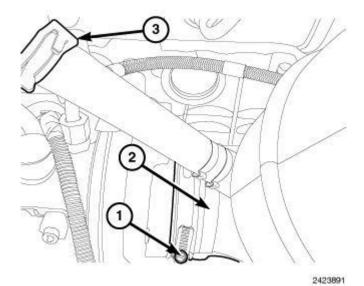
Clamp, Outlet Tube & Breather Hose Courtesy of CHRYSLER GROUP, LLC
